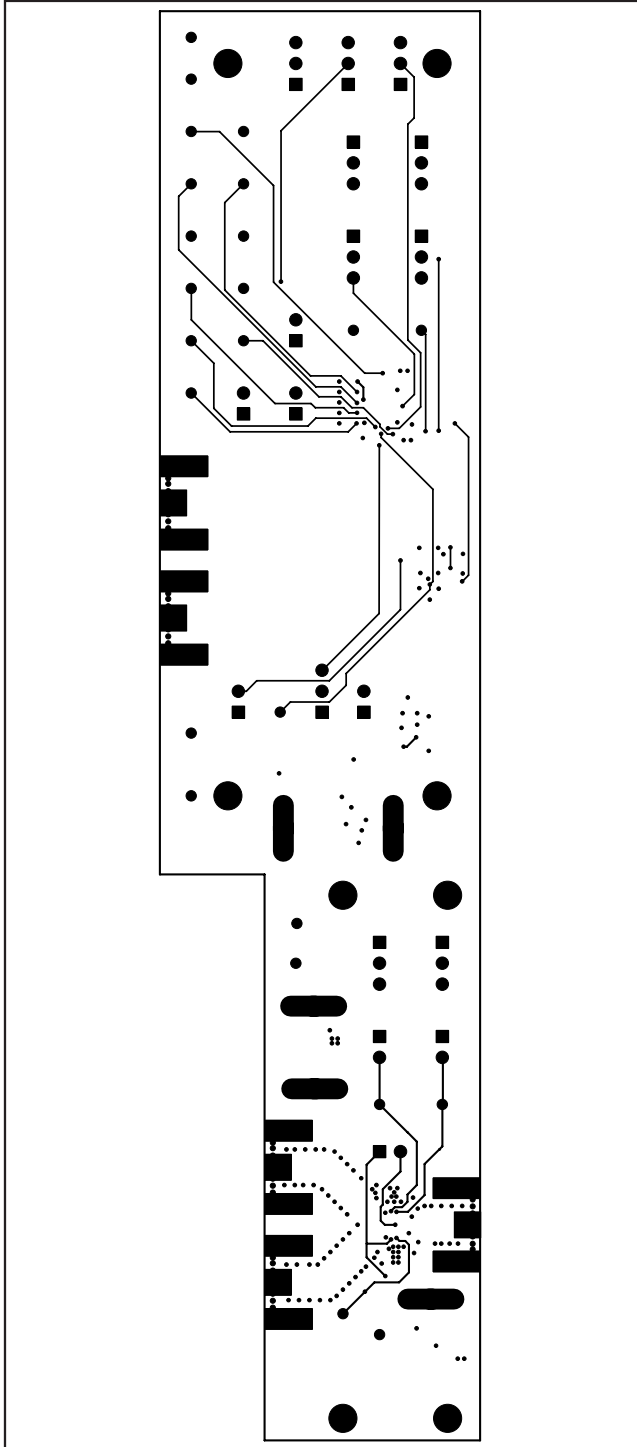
MAX3975 EV Kit PCB Layout—Solder Side
